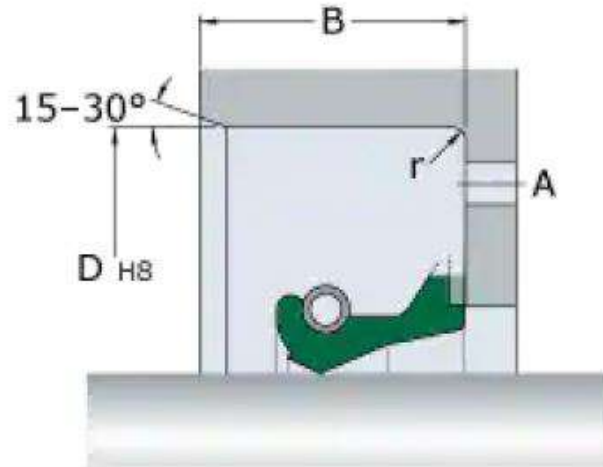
Bore requirements for SKF's radial shaft seal assembly. From SFK (2019).
